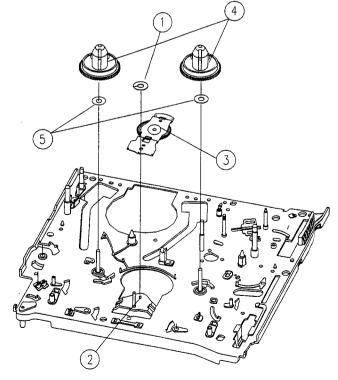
IDLER PLATE TOTAL ASS'Y & S/T REEL TABLES REMOVAL
